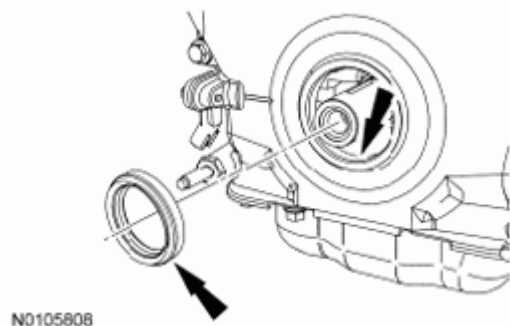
Locating Crankshaft Front Seal Inner Lip
